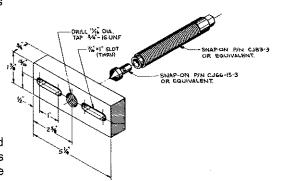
Illustration of Bar Puller (See drawing on page 34 for further details)
